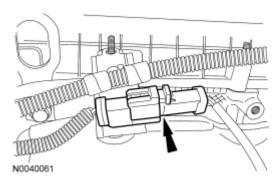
Locating Wiring Harness Bracket Courtesy of FORD MOTOR CO.
